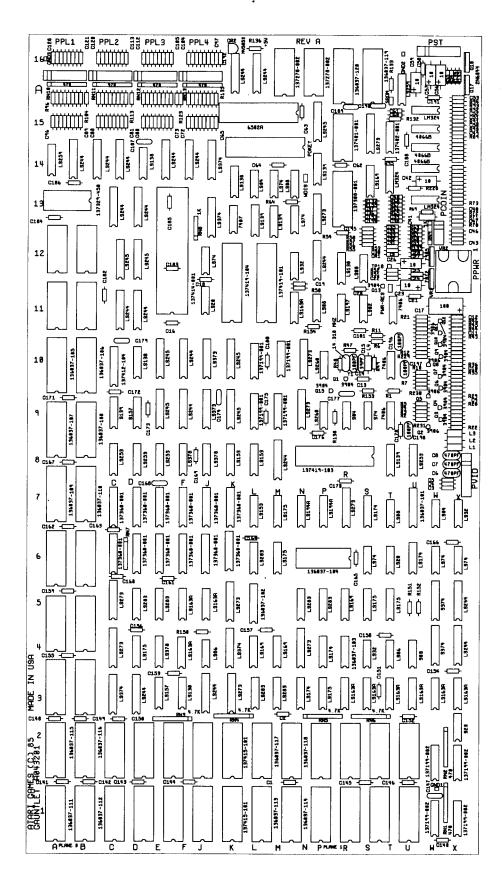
Gauntlet Game PCB Assembly A043201-21 B
